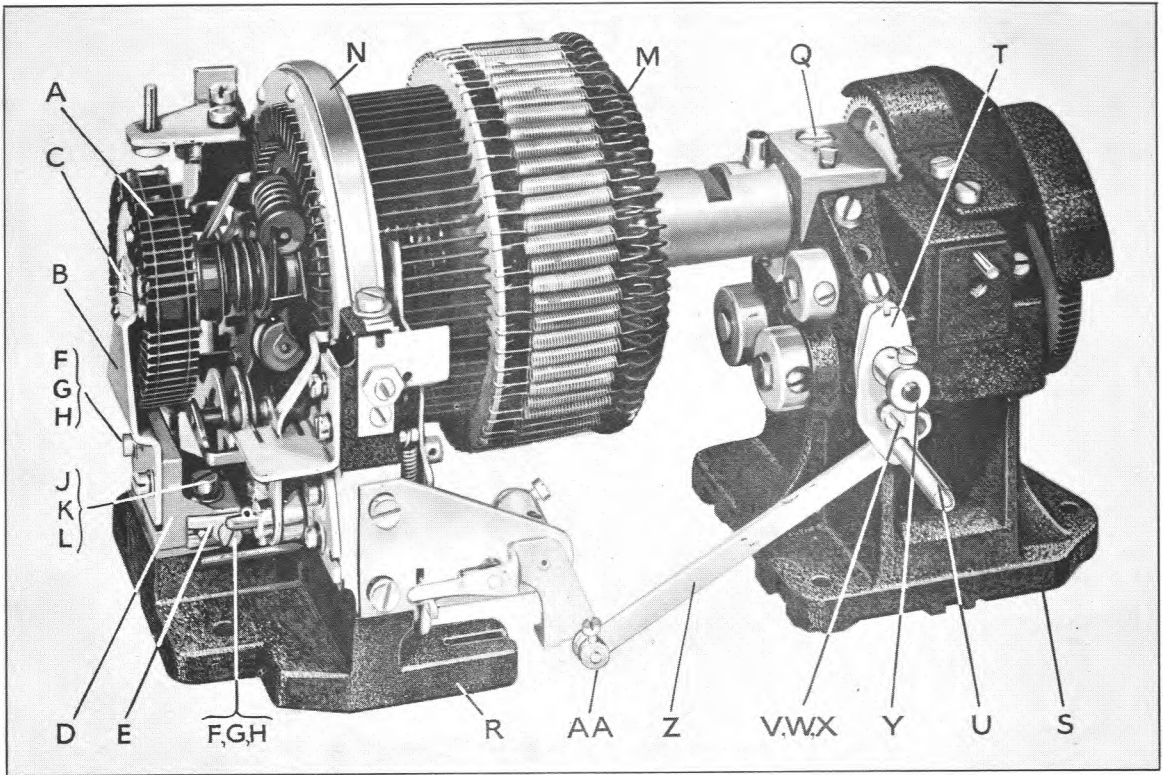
TYPEHEAD, COMBINATION HEAD, CONTROL LEVERS AND GEAR UNIT
